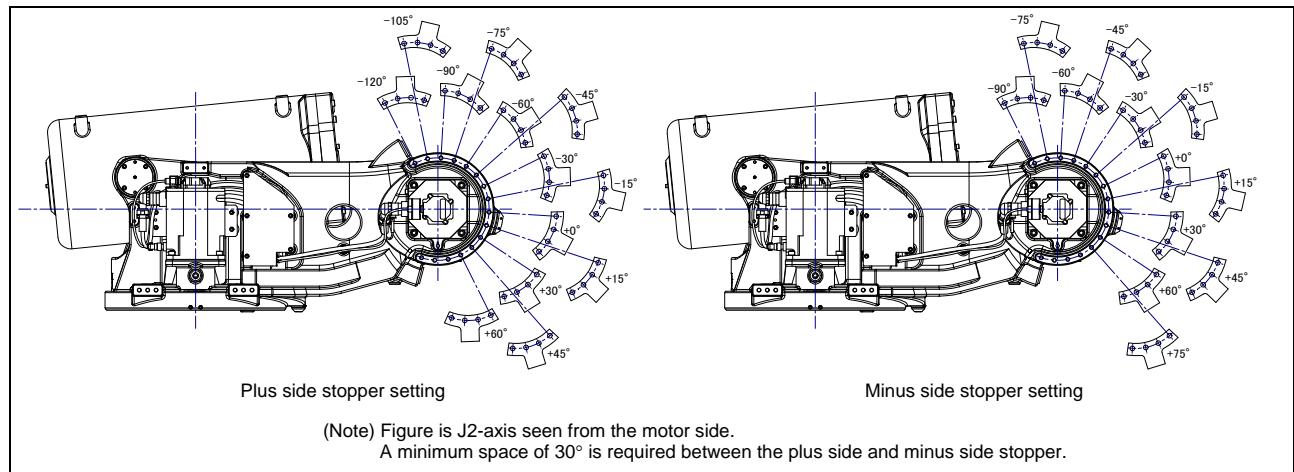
(l) Mounting the J2-axis adjustable mechanical stopper (2/2)
